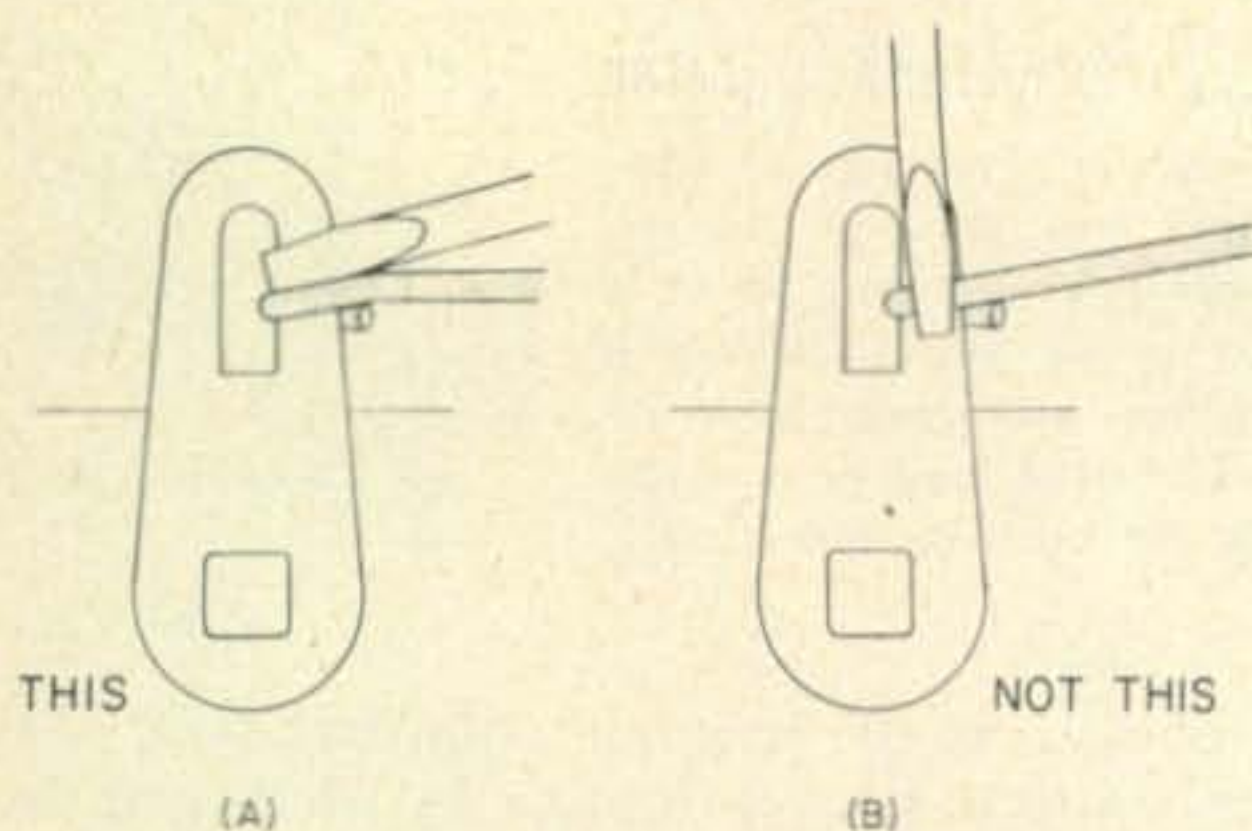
(A) Application of the soldering iron to several parts. The larger side of the soldering tip rests against the terminal lug which has a larger mass than the component lead against which the smaller edge of the tip rests. (B) Application of the iron to just the smaller component lead is incorrect.
